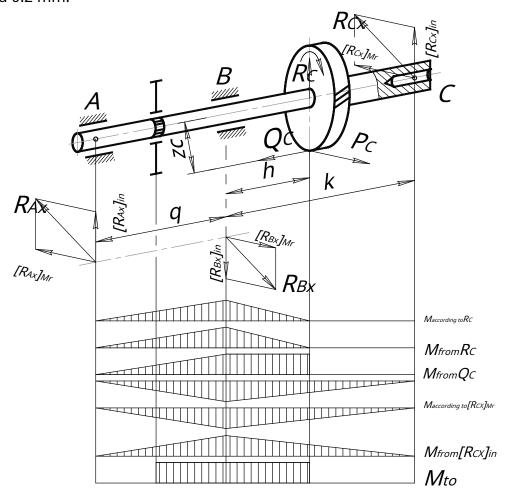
Calculation scheme of the primary shaft with helical gears
